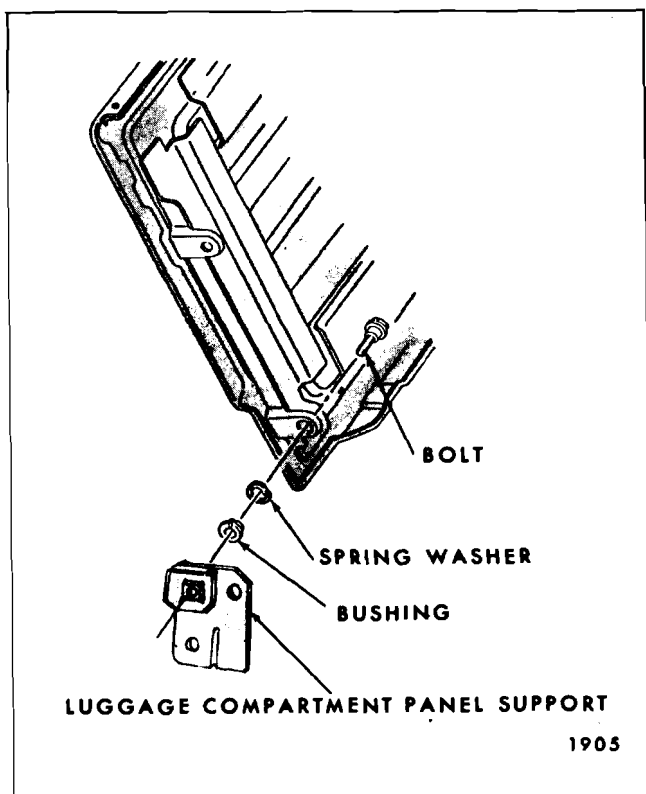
Luggage Compartment Panel Attachment to Body
